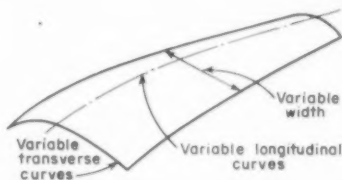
is a sketch showing how the surface of an Androformed panel may be varied. Thickness of the formed parts is uniform and the formed panels are identical. Fig 4 shows stacked skins which illustrate the uniformity of the process. Shapes can be widely varied as follows: simple contour, compound contour, convex-concave contour or combinations of these three forms. The centerline of the contour can be made parallel to the panel sides, at an angle to the panel sides, or on an arc or curve.
